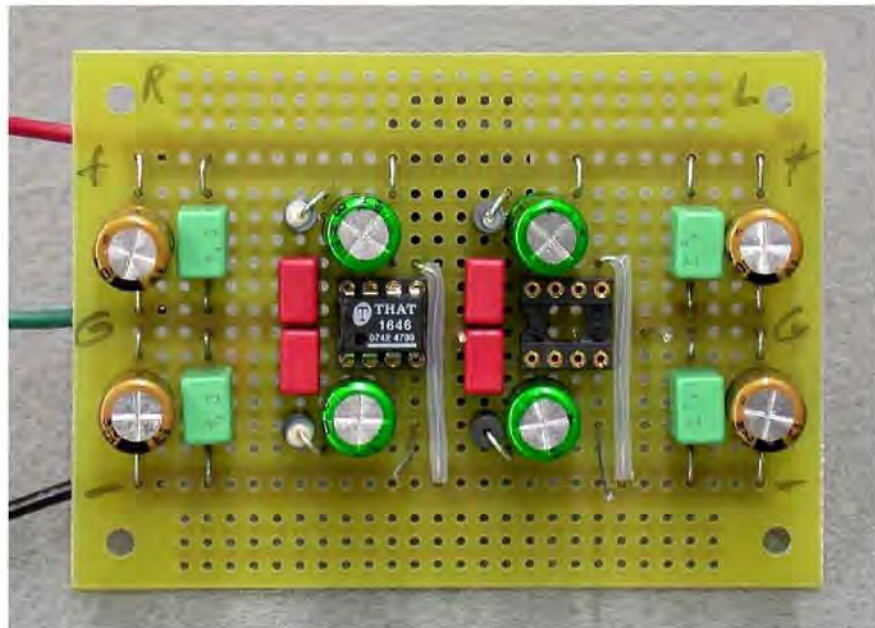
A stereo pair of THAT 1646 balanced line drivers built on DH Labs' D-4 prototyping board. For illustration, the 1646 chip has been removed from the machined-pin, gold-plated IC socket on the right. Power supply bypass capacitors are located on each end of the board. Leads have been attached for testing.
